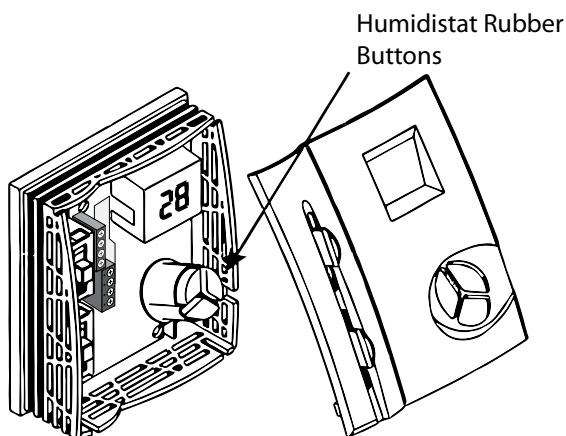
Make sure the rubber buttons align with the holes in the cover.
